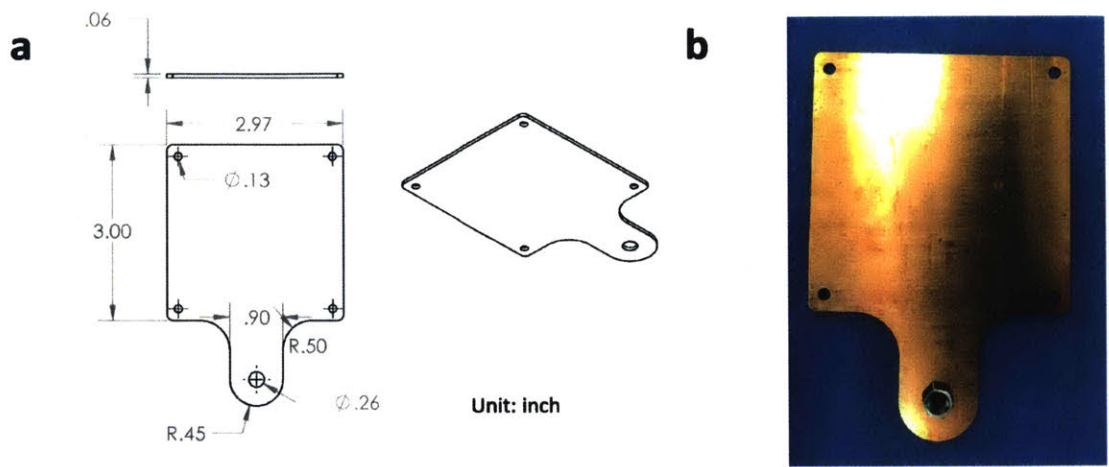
(a) Detailed dimensions for the aluminum holder; (b) Photo of the aluminum holder.
